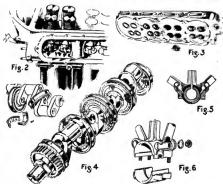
Induction aide of head-block. Fig. 3—Under side of head-block. Fig. 4—Crankshaft assembled with bearings. Fig. 5—Big end lubrication detail. Fig. 6—Big end construction
